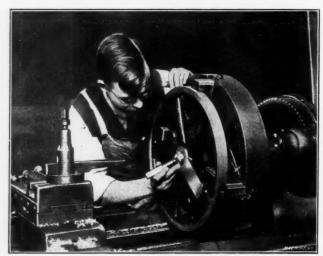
Gaging the Bore of a Pulley with the Atlas Ball Gage
